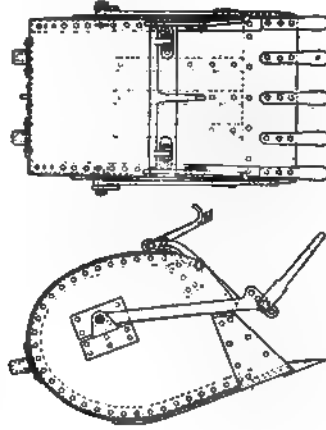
Skip or Shovel Bucket used on Calhoun Cableway.
